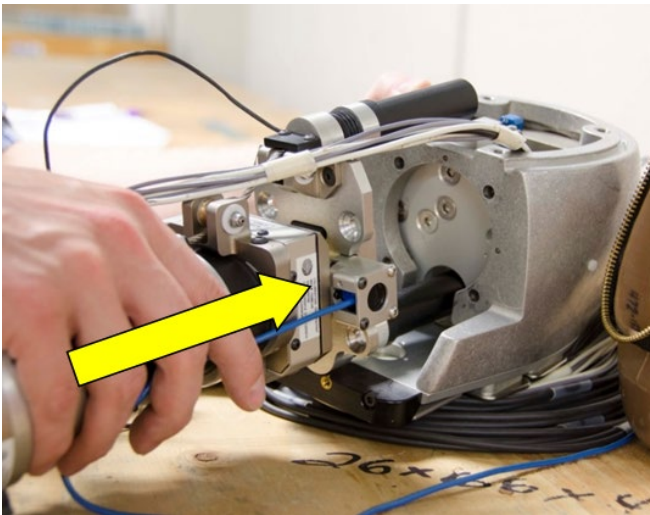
Alignment and installation of neck assembly to skull assembly.
